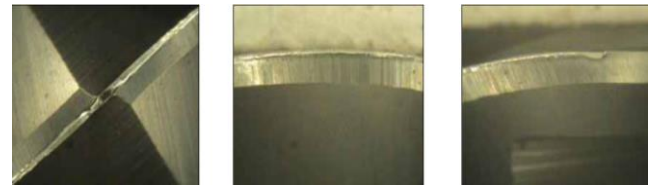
The second cutting experiment of multi-layer AlCrN composite coating tool edge wear morphology.
